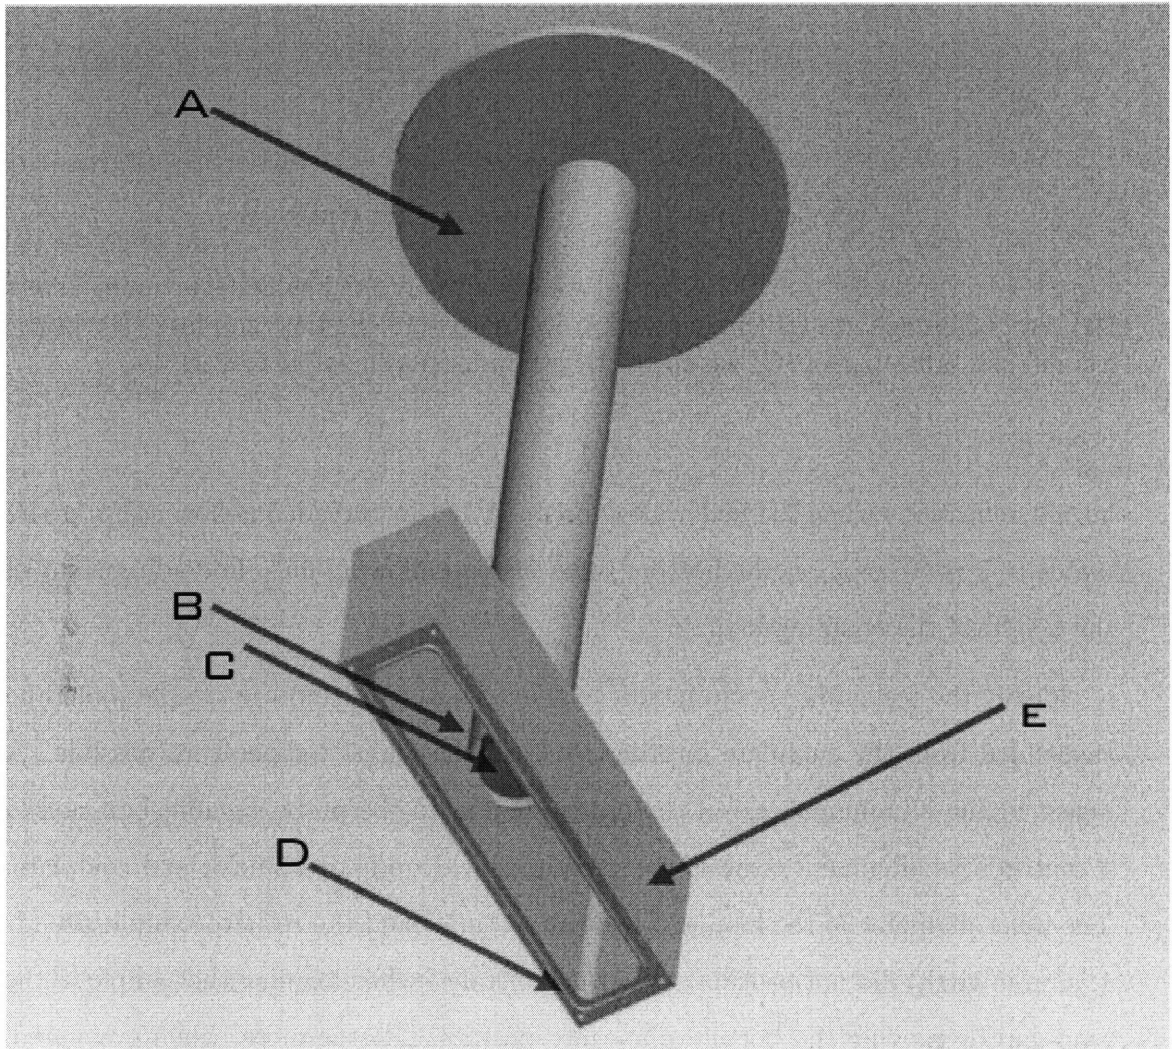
Cryostat-Probe Interface. Outer vacuum shield (A). Radiation Shield (B). Copper cold plate (C). O-ring groove (D). Vacuum Box (E).
